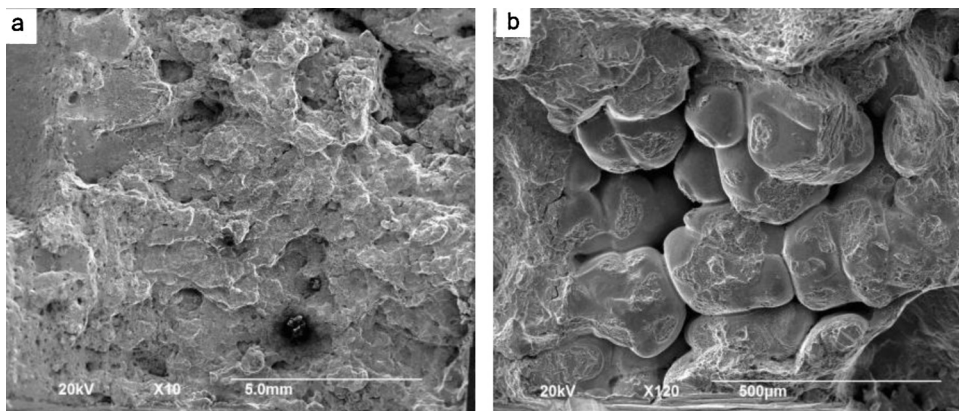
SEM image of original fracture surface of specimen B (a); a local enlarged view in (a), (b).
